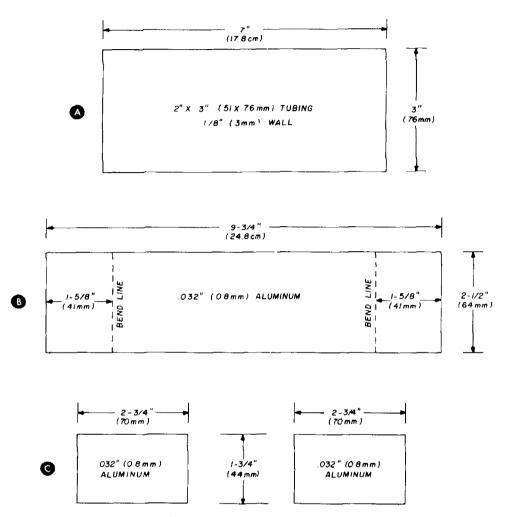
Dimensioned layout for components of an enclosure having a usable area of $2\frac{1}{2}$ x7x2 inches (6.4x17.8x5.1 cm).
